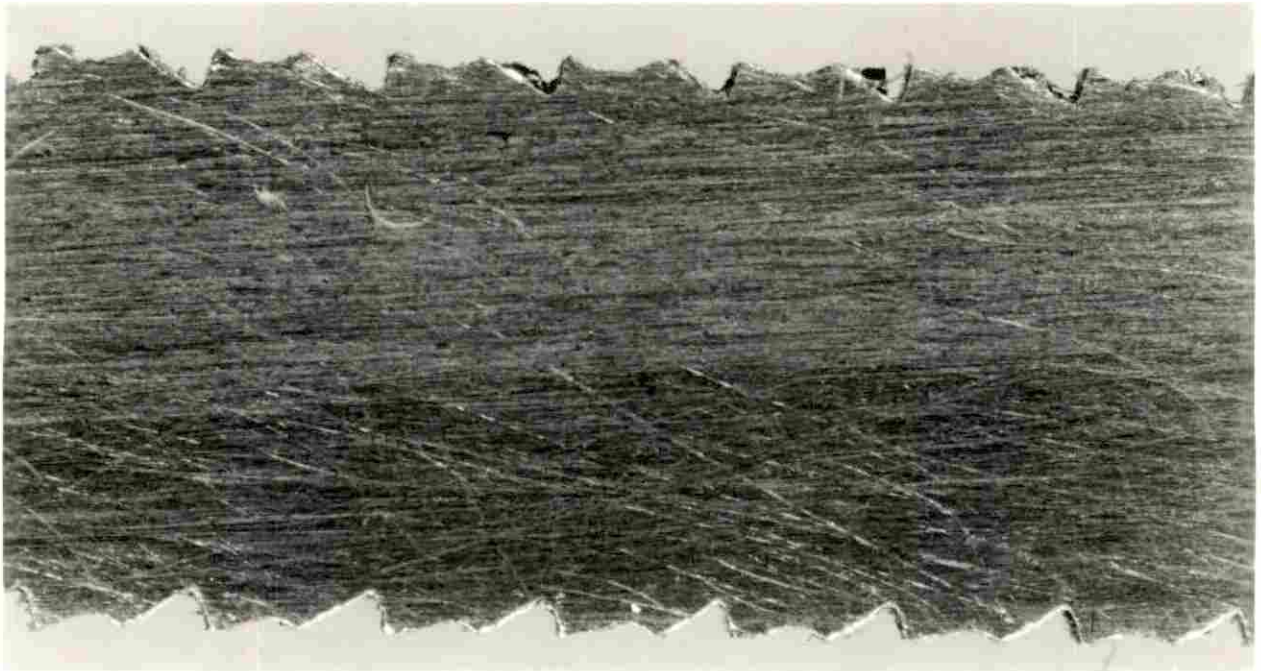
Longitudinal section of nail No. 2613 (x20d).
